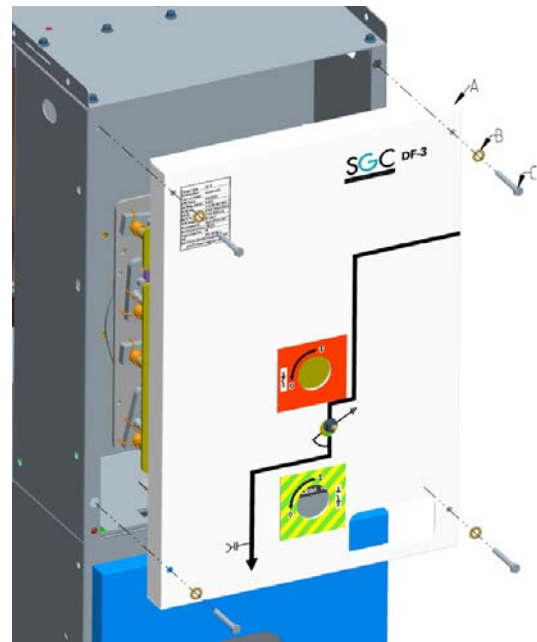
Disassembling of the front panel of the DF-3 cubicle
